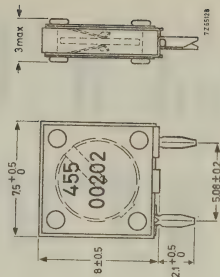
Version for printed-wiring boards with holes of 0.8 mm
